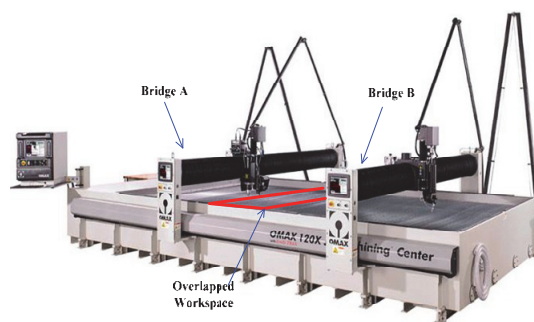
Dual-bridge Waterjet Cutting Machine Tool
